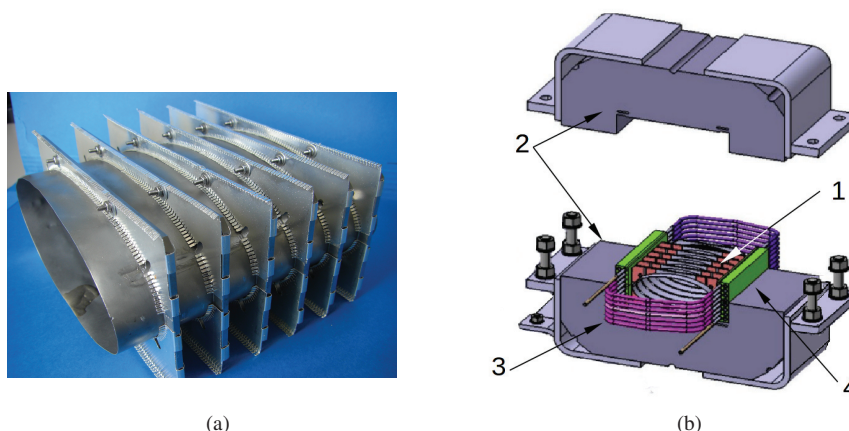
The vacuum chamber with a direct cooling. Test set-up. (a) Segment of the vacuum chamber. (b) Mock-up assembly for the test: 1 segment of the vacuum chamber with "thermal conductive" ribs, 2 yoke segments, 3 cooling circuit of the coil, 4 segment of the superconducting coil.
